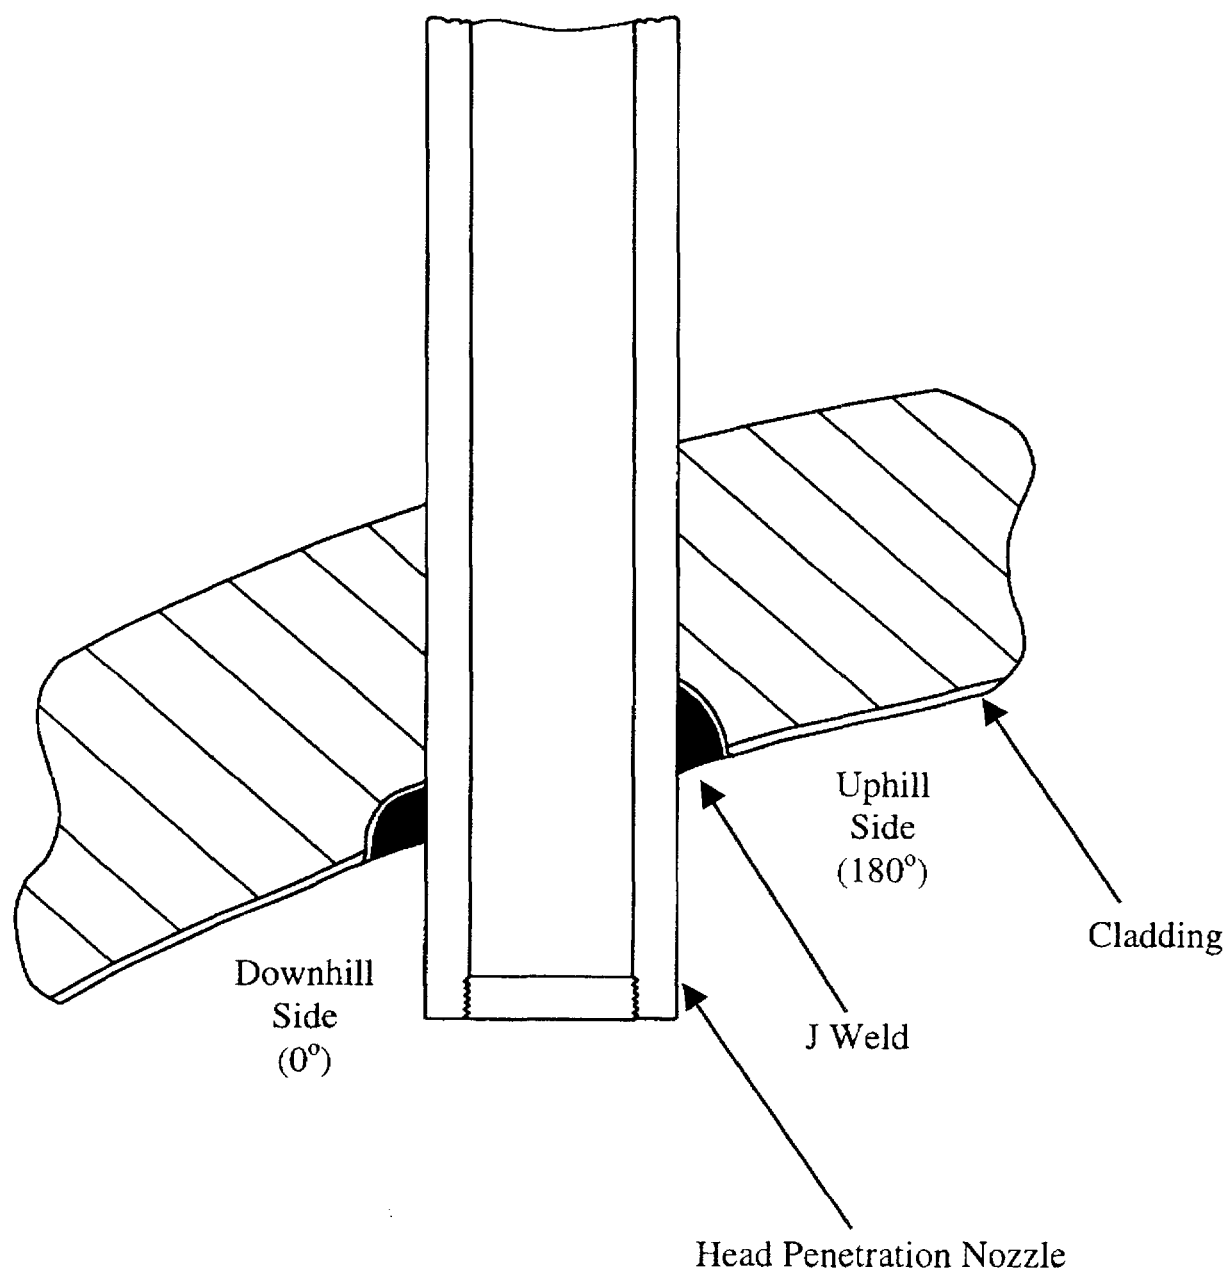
Reactor Vessel Control Rod Drive Mechanism (CRDM) Penetration
